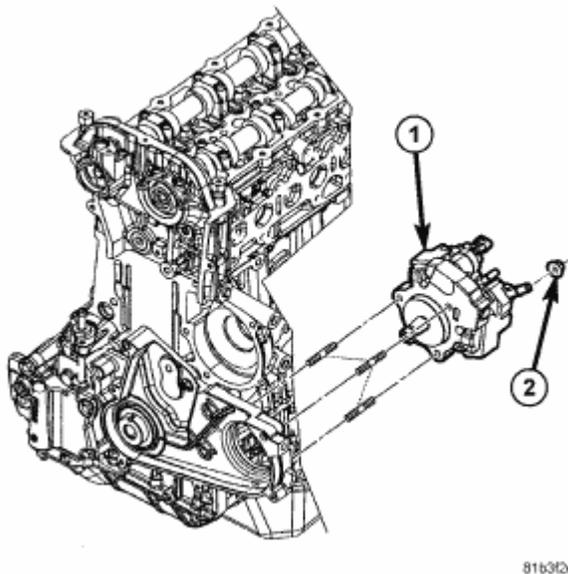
Identifying Fuel Injection Pump & Fuel Quantity Solenoid
